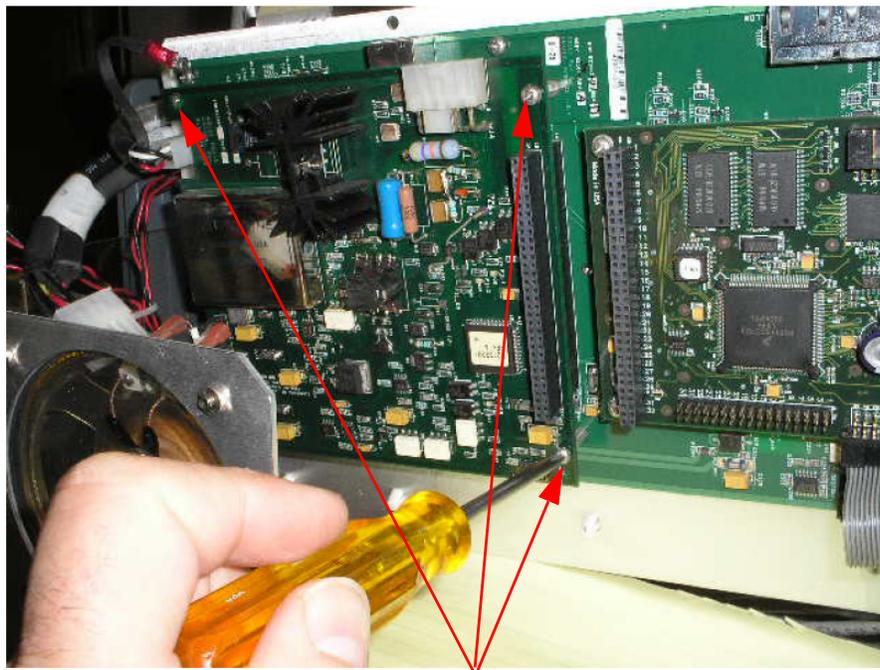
Electronics Assembly - Right Hand and Top Screw
